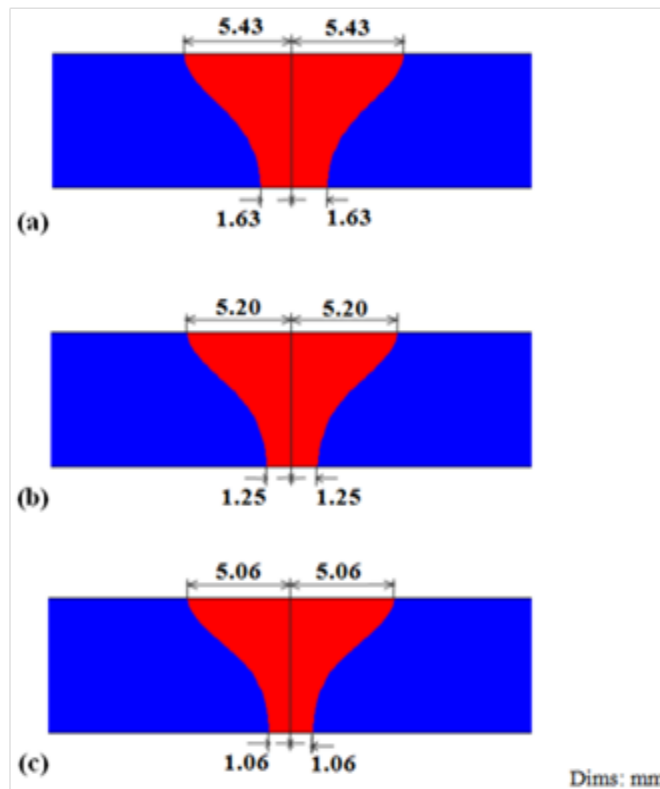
Weld Fusion Zone for a Heat Input of (a) 2.25 kJ/mm, (b) 1.96 kJ/mm, and (c) 1.75 kJ/mm
